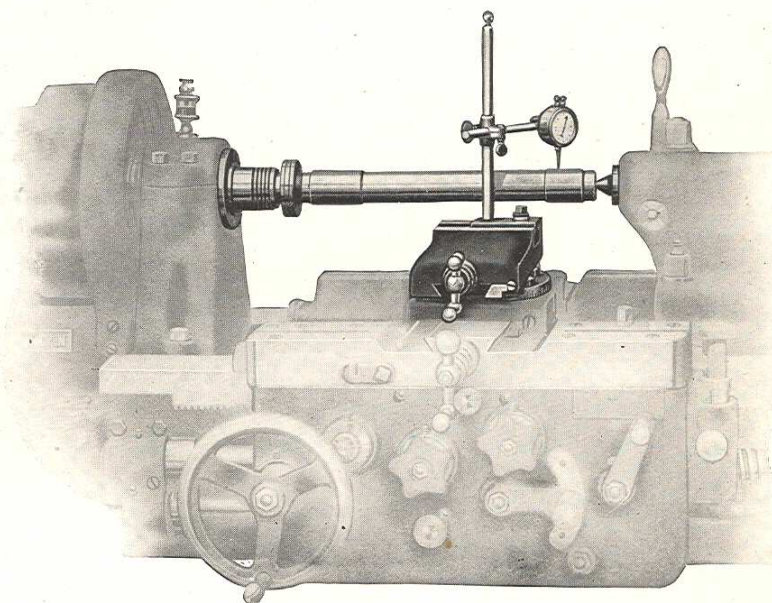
Showing Method of Aligning Headstock and Tailstock Spindles.
